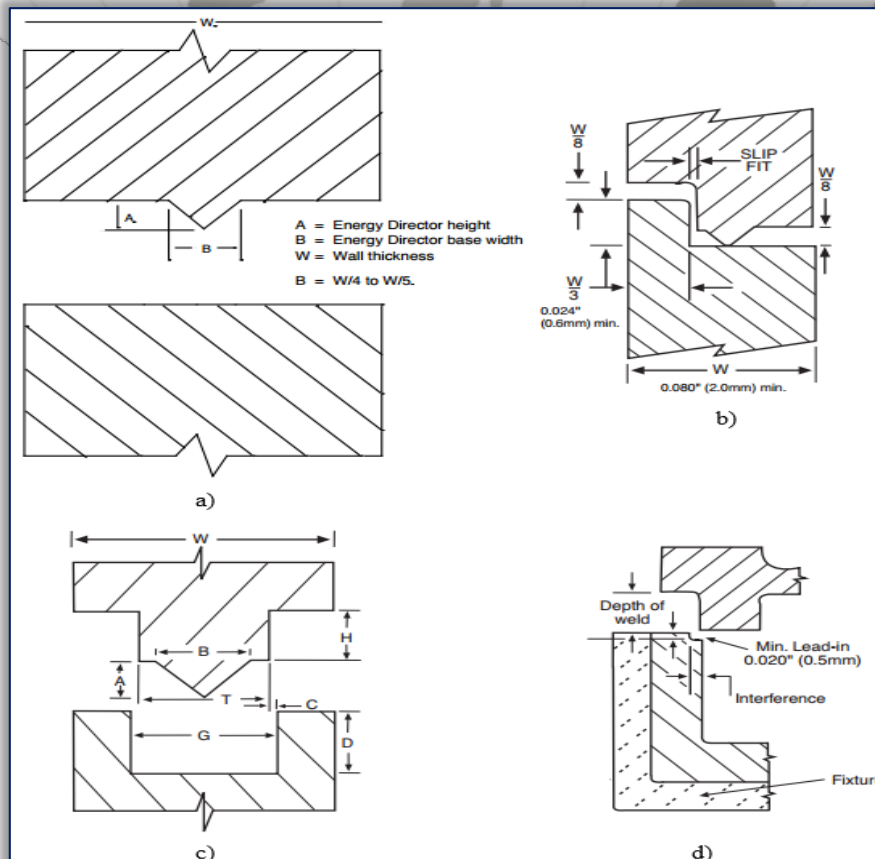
Types of joints, a) butt joint, b) step joint, c) tongue and groove joint, d) shear joint
